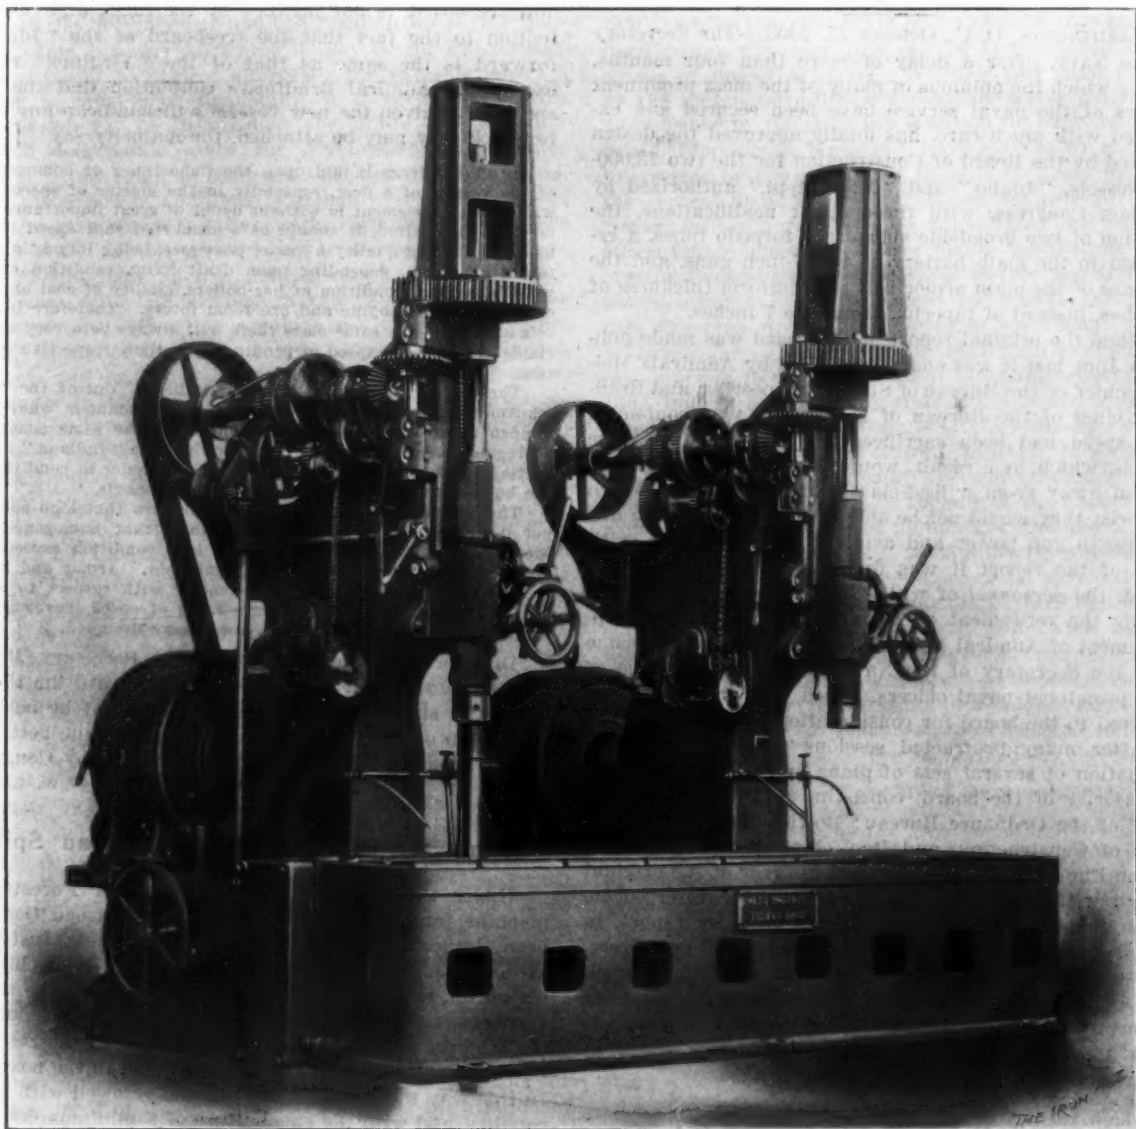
Baker Belt Driven Double Spindle Boring Machine.
